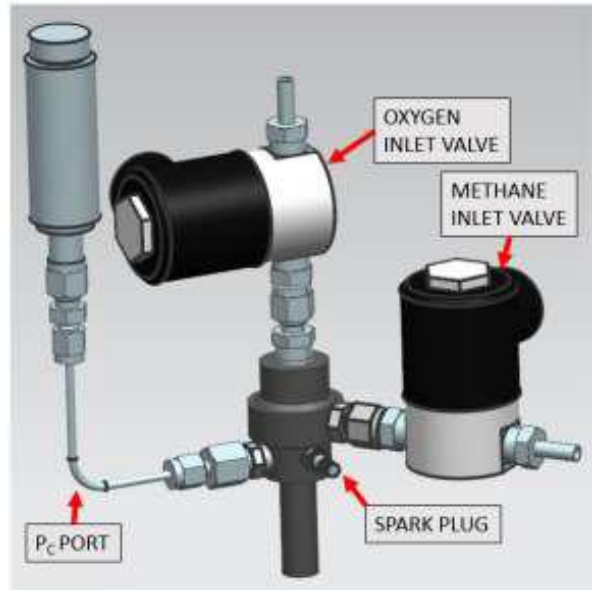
Shear Coaxial Torch Igniter Assembly CAD
